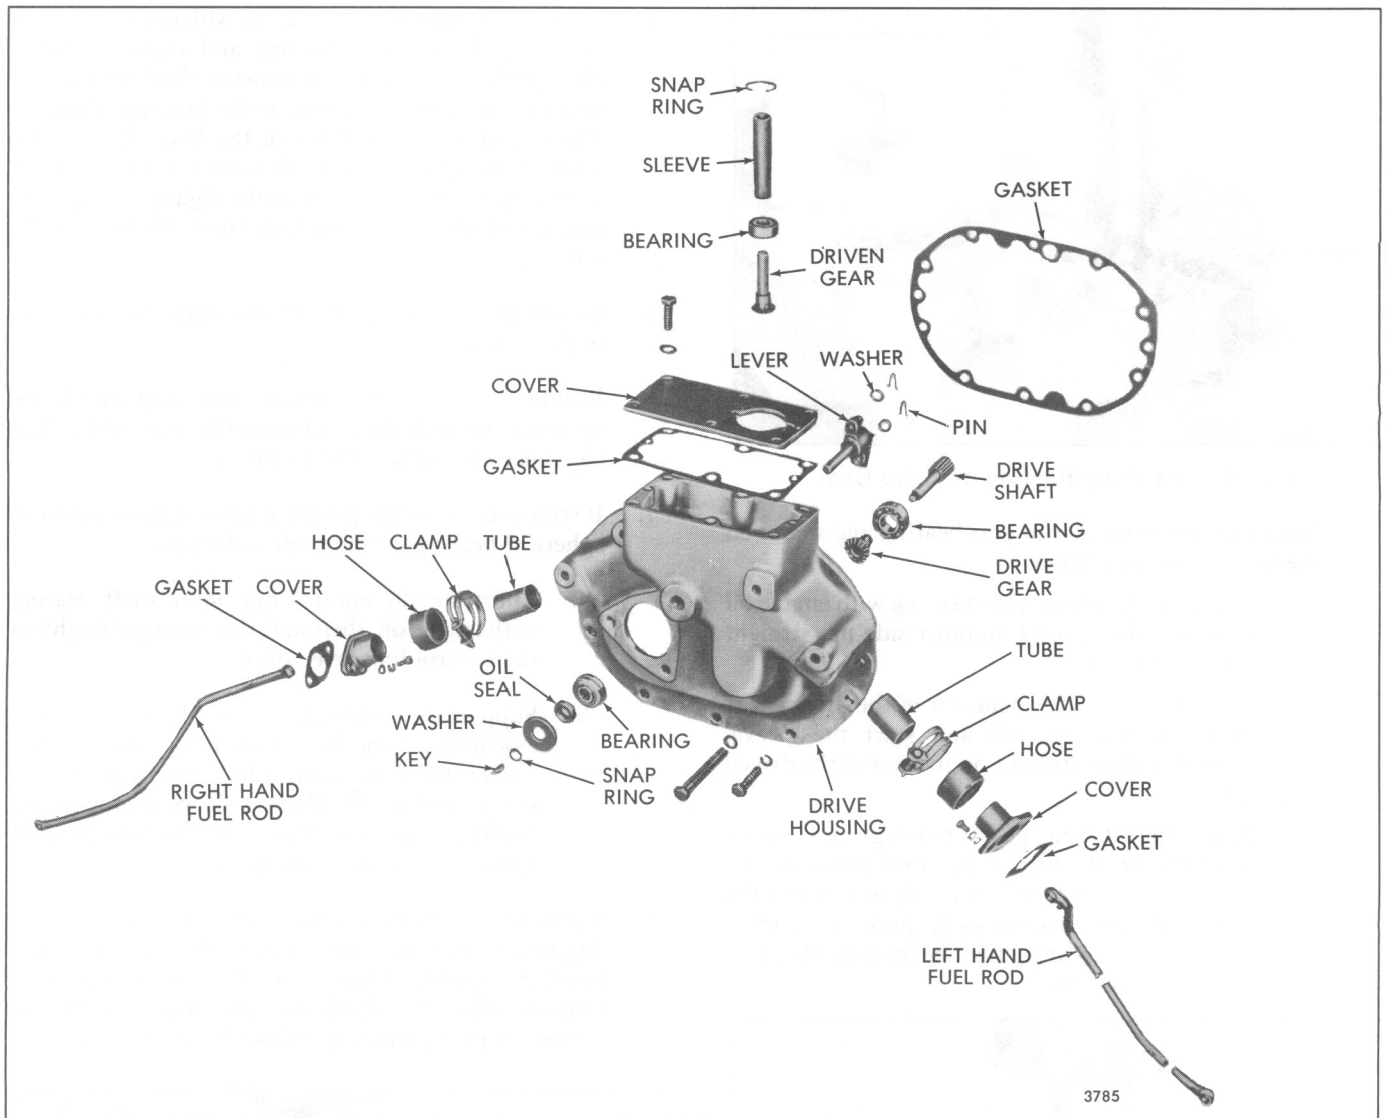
Details of Enclosed Linkage Type Hydraulic Governor Drive and Relative Location of Parts
